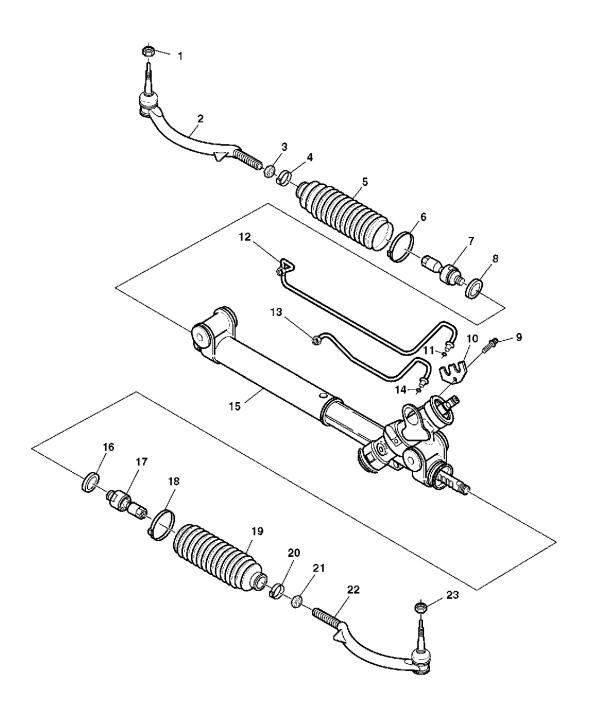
Identifying Power Steering Gear Components Courtesy of GENERAL MOTORS CORP.
